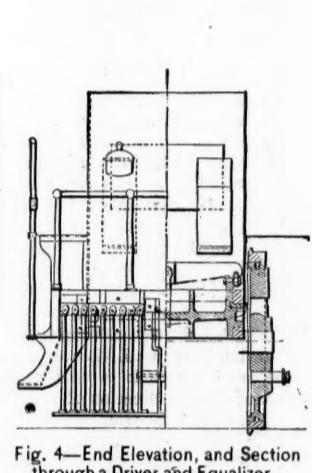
End Elevation, and Section through a Driver and Equalizer.
